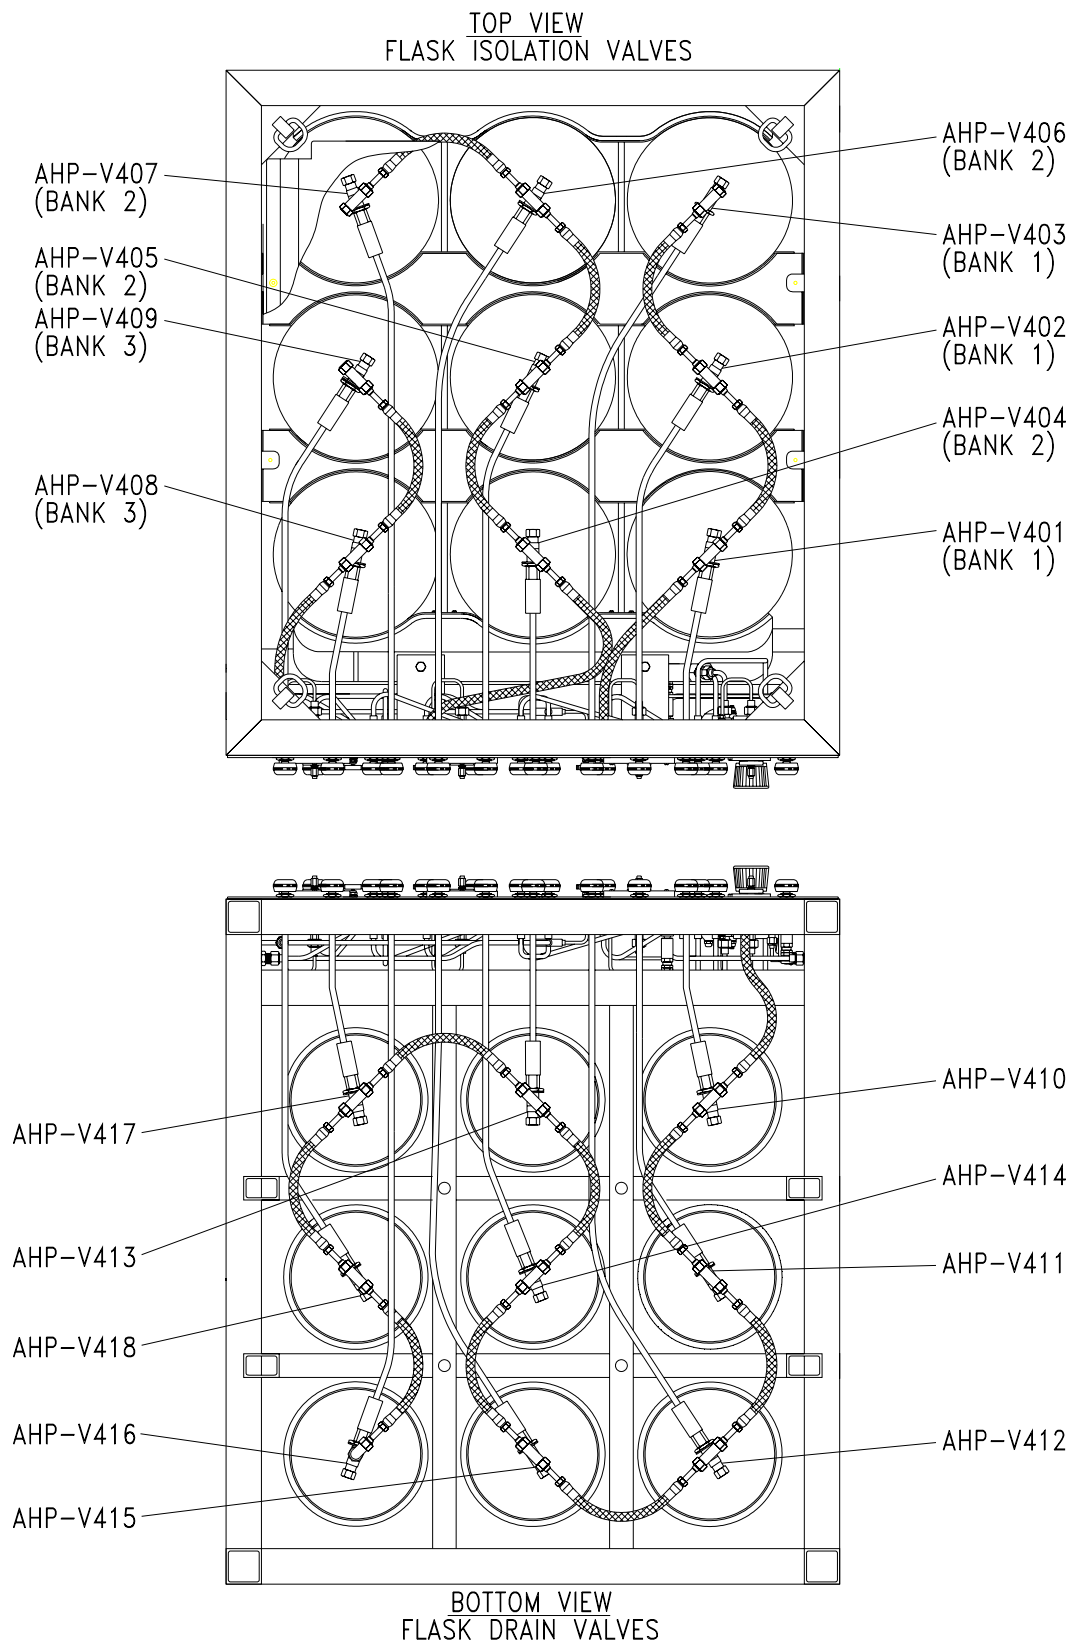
AFRA Flask Connections, Top and Bottom Views
